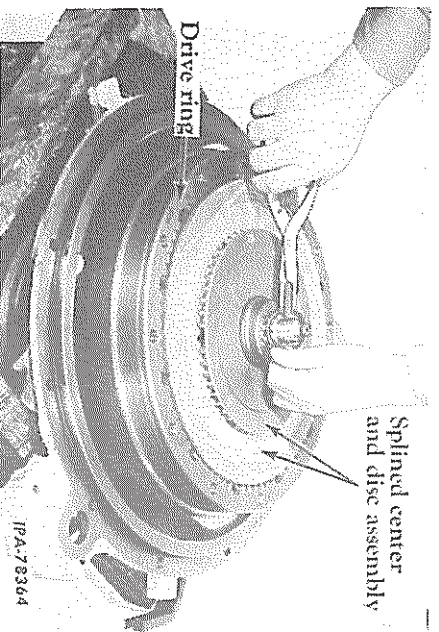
Removing the Splined Center and Disc Assembly Snap Ring
